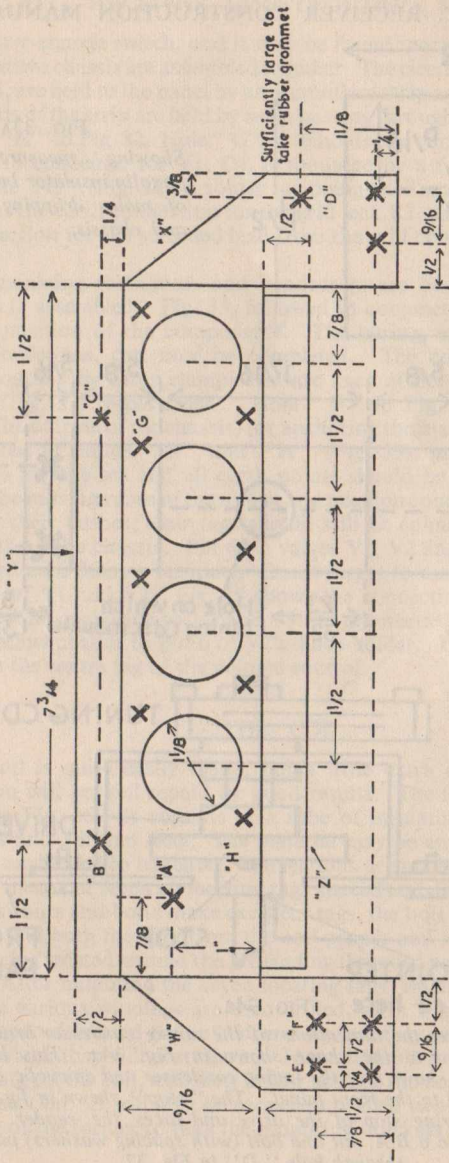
Top plan of smaller chassis. All holes are 4B.A. clear with the exception of "D." The holes for mounting the valve-holders will vary according to the make, and should be marked out after the valve holders are obtained. Other references are dealt with in the text.
